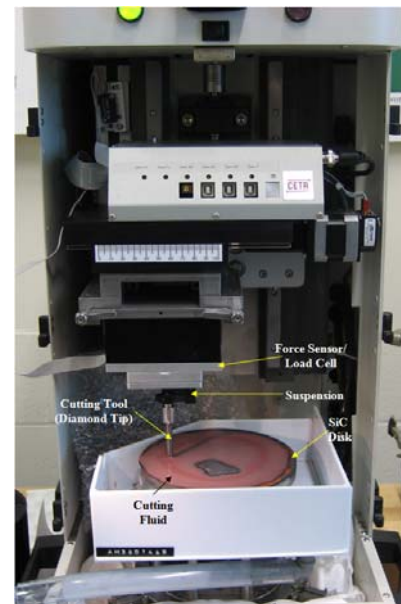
Machining Setup for the 6" CVD coated SiC disk
